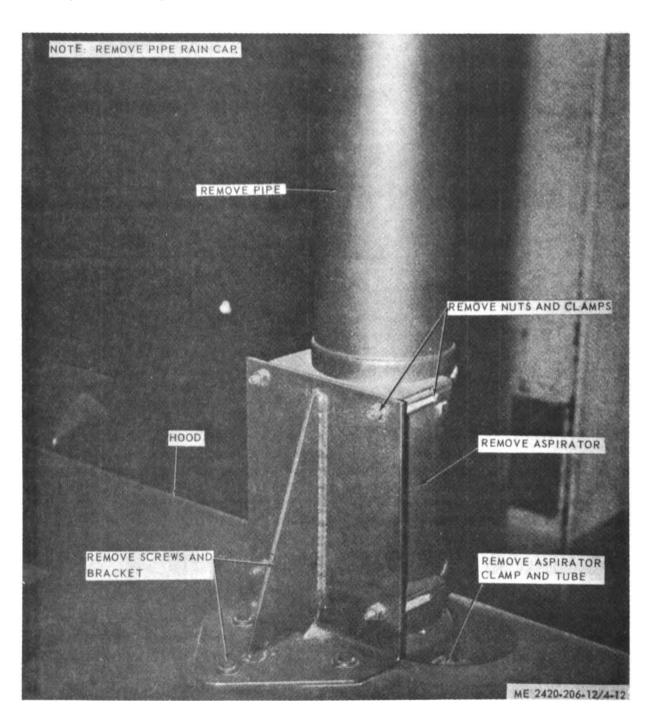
Aspirator and exhaust pipe, removal and installation.
